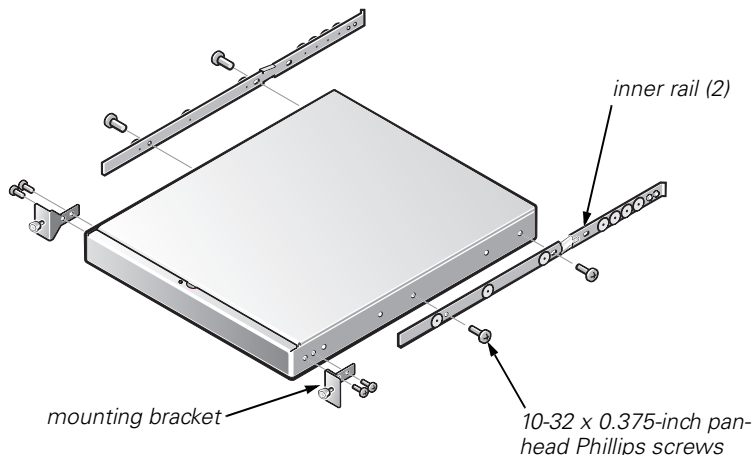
Installing the Inner Rails and Mounting Brackets
